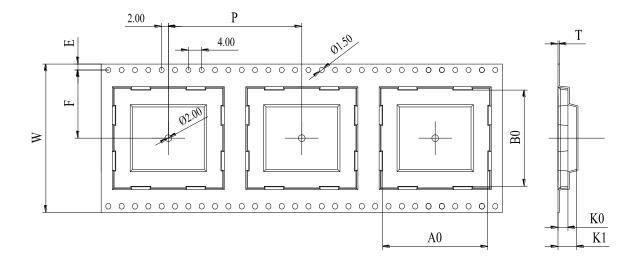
Carrier Tape Dimension Drawing (Unit: mm)
